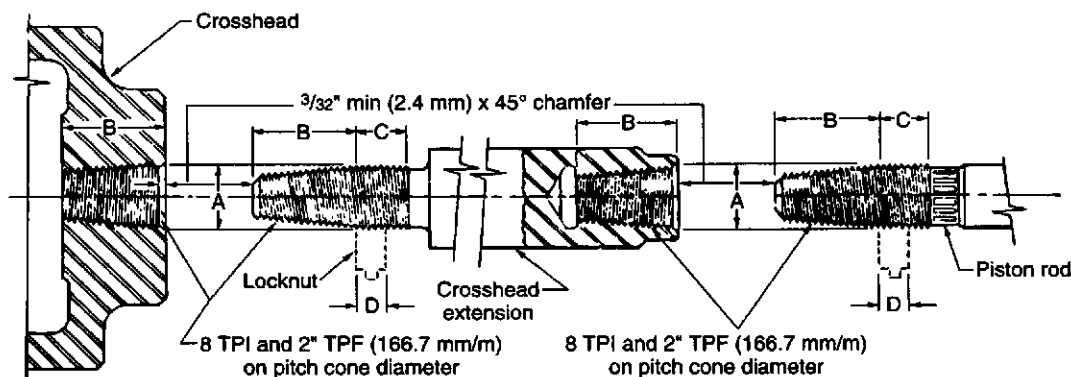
Crosshead, Crosshead Extension, and Piston Rod Connections—Tapered Thread Type
